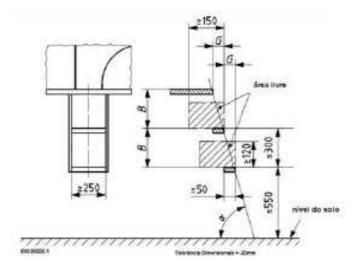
Dimensions in millimeters of means of access for self-propelled machinery
